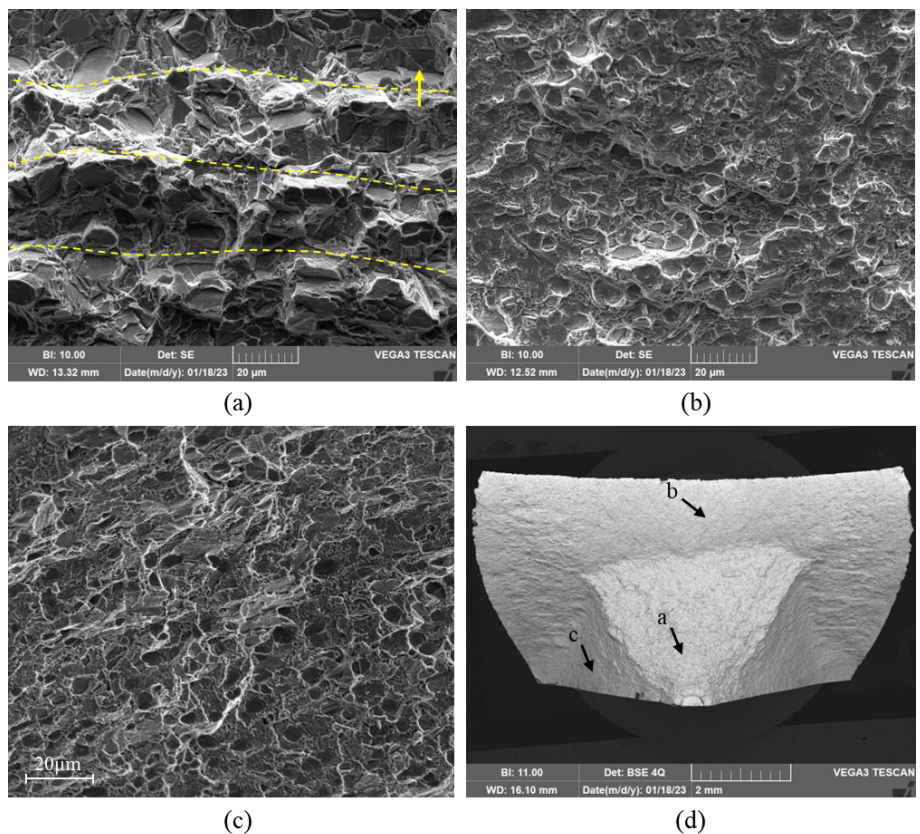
Fractographic analysis with scanning electron microscope (SEM) of the fracture surface of the uniaxial specimen A1: (a) Stable crack extension surface; (b) Final fracture surface; (c) Final fracture surface on secondary plane; (d) Global view of the fracture surface.
